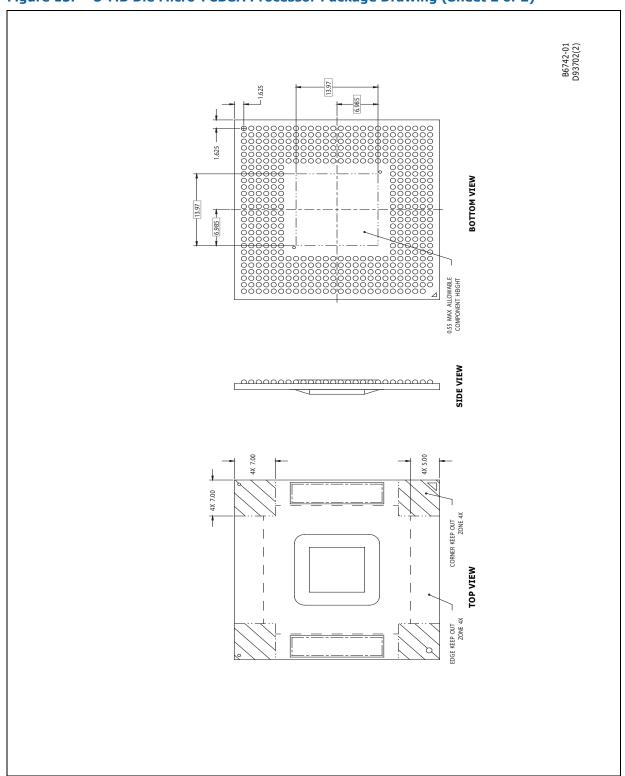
Intel Core 2 Duo Mobile Processor (POP and LV) Die Micro-FCBGA Processor Package Drawing
